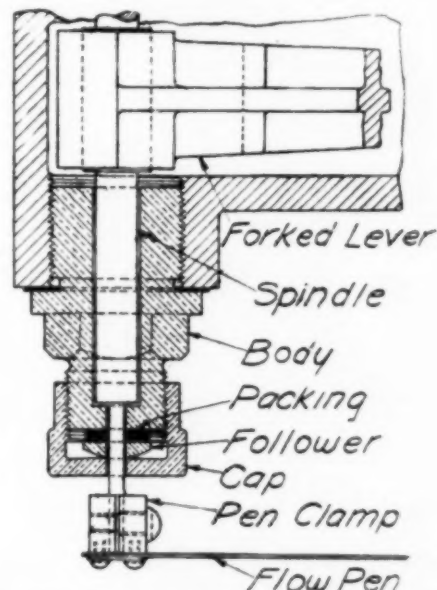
DETAIL OF PRESSURE TIGHT BEARING
